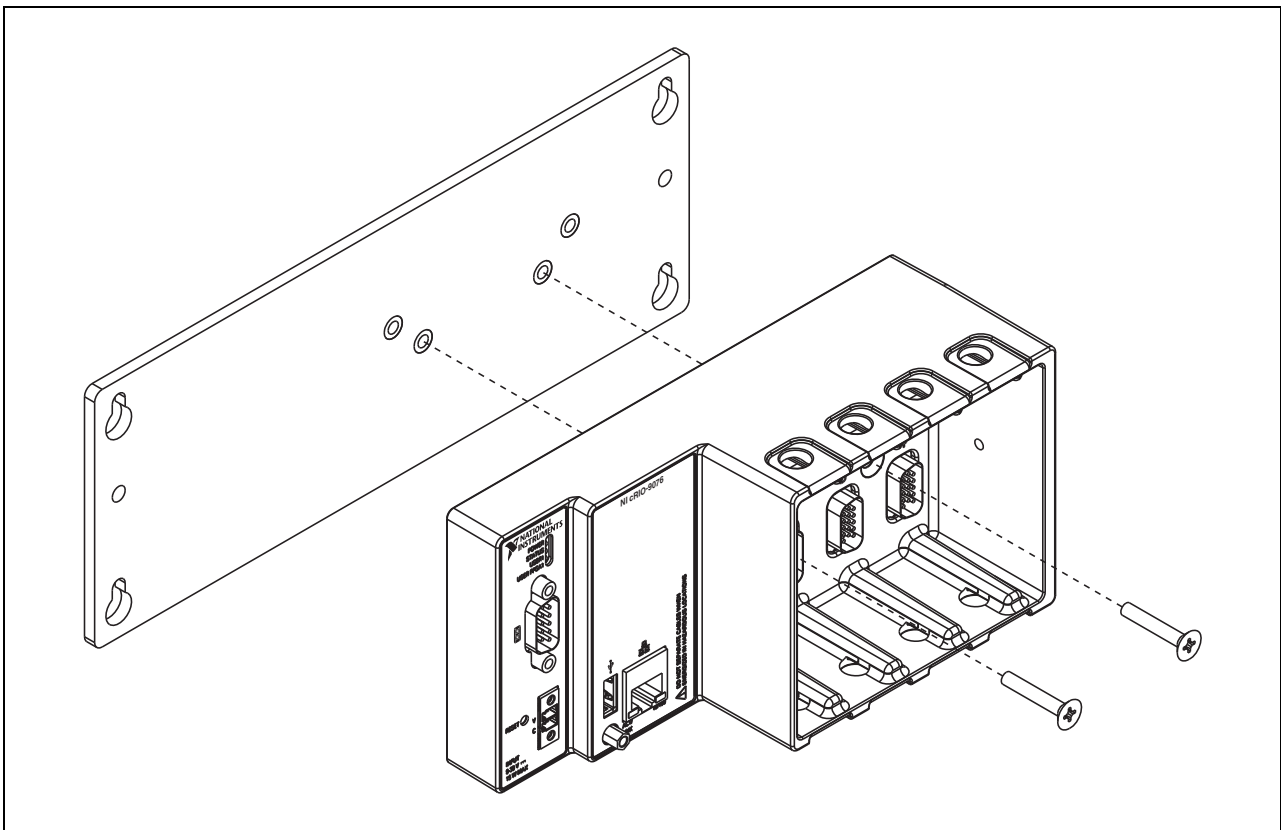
Installing the Panel Mounting Plate on the cRIO-9075/9076
